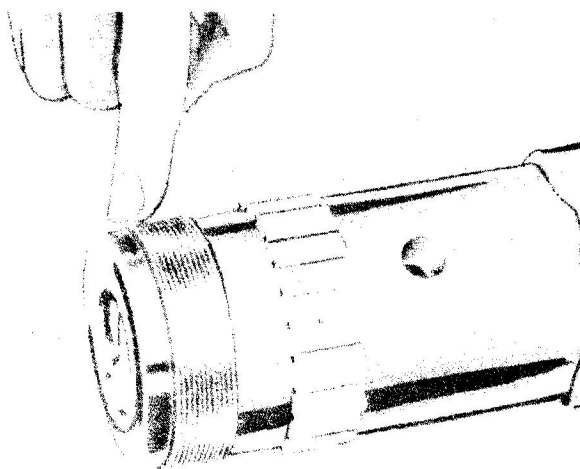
Checking Valve Housing—Transfer Plate Gasket
